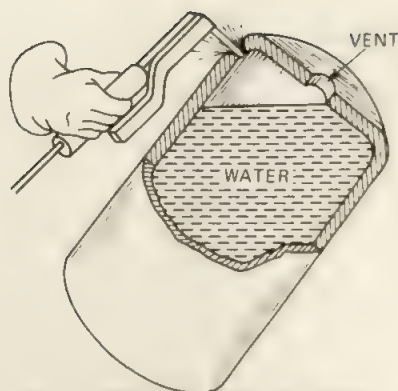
Safe way to weld containers that hold combustibles.
